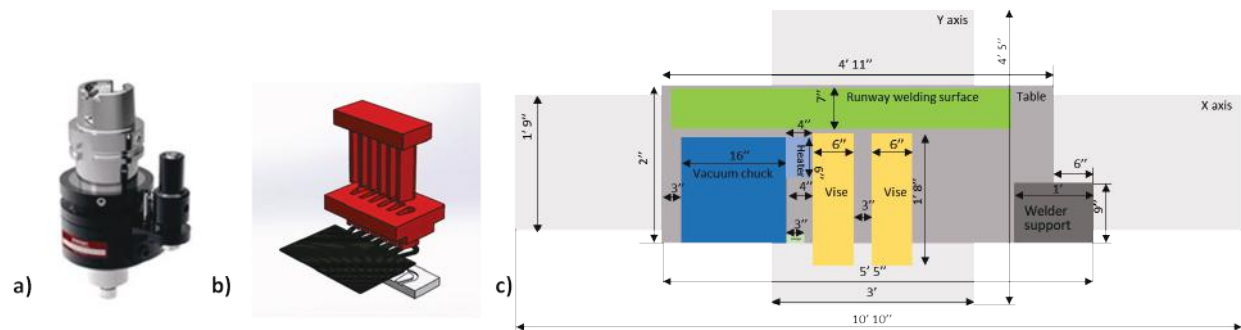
UAM process modifications: (a) spindle speed increaser; (b) fiber alignment device; and (c) runway welding surface. Source: The Ohio State University.
